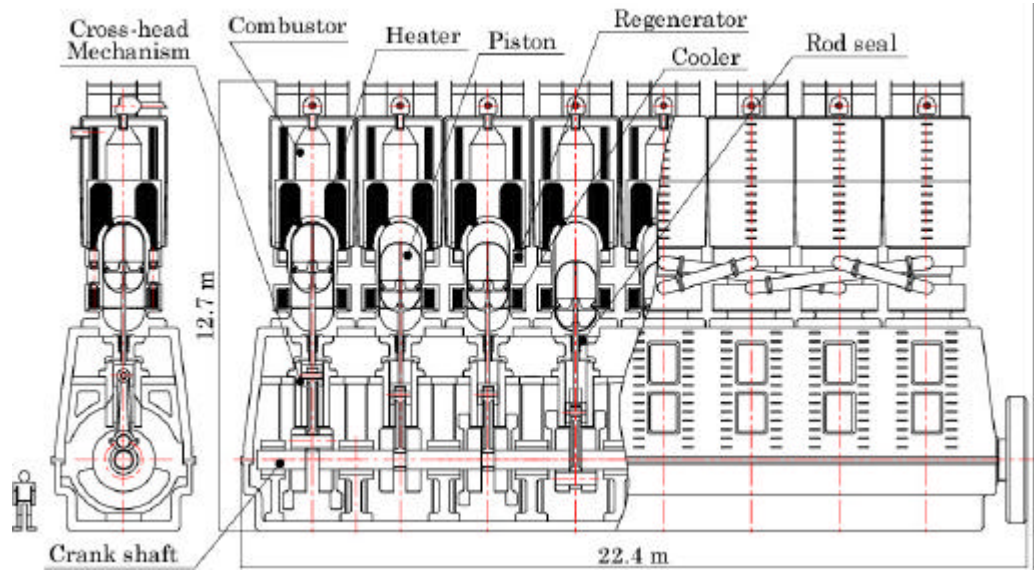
, Conceptual drawing of the 20,000 kW class marine Stirling engine
